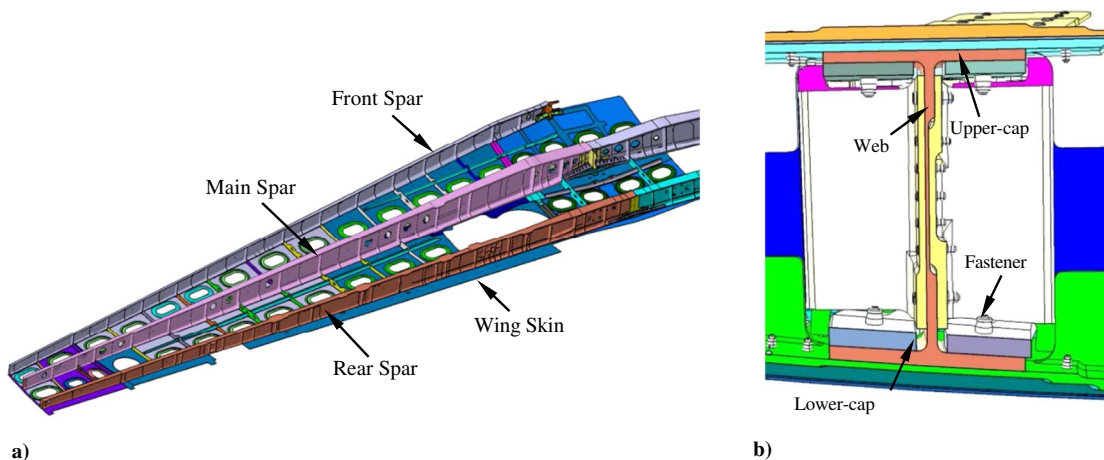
Representations of a) wing assembly of a business jet, and b) cross-sectional view of wing assembly at main spar.
